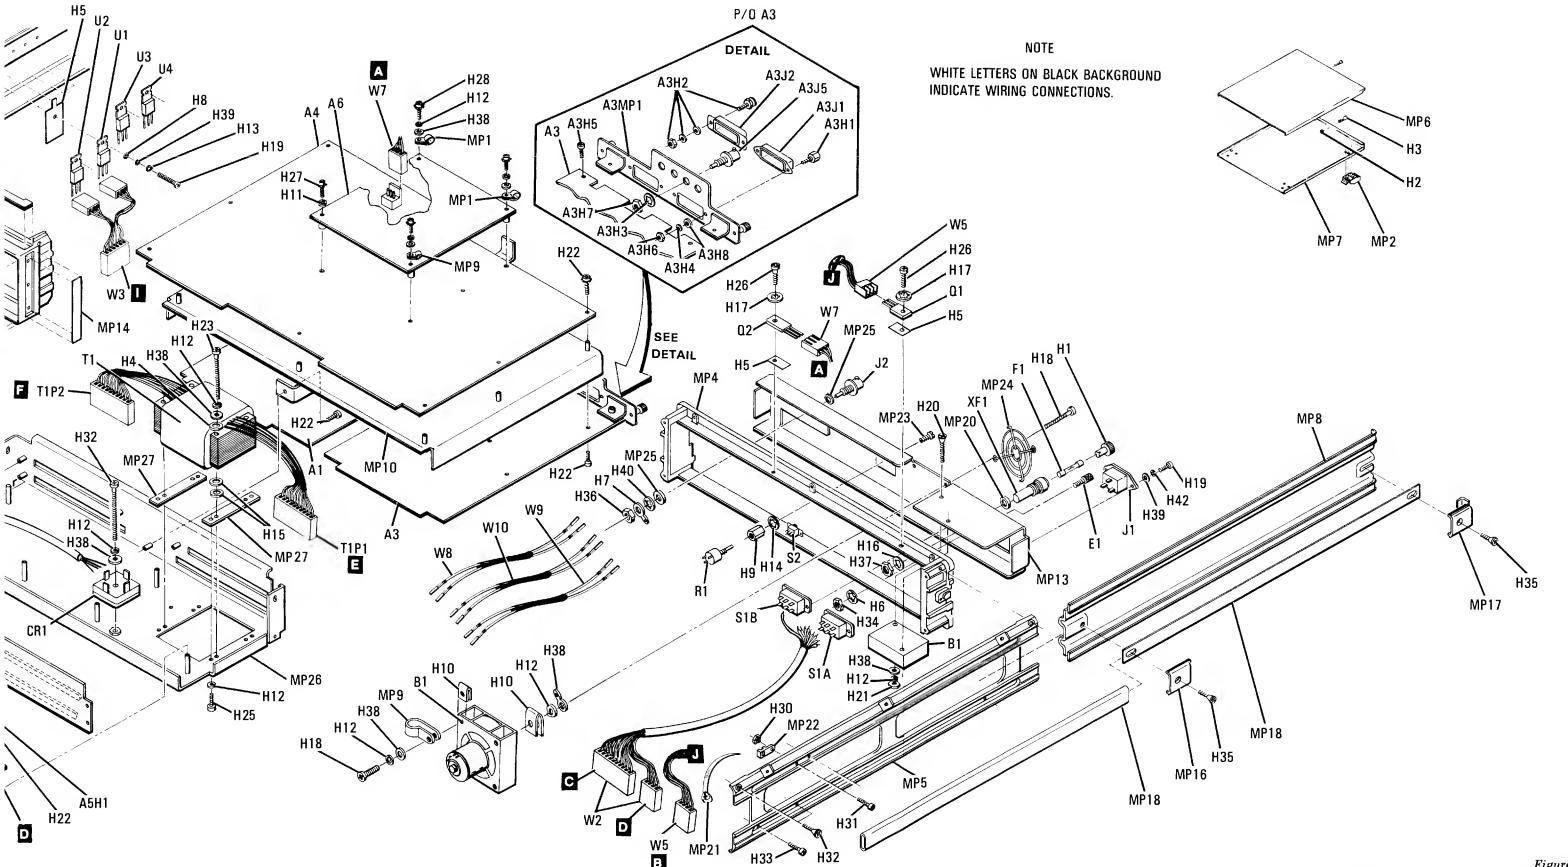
Chassis Parts and Board Assy Identification 6-3
